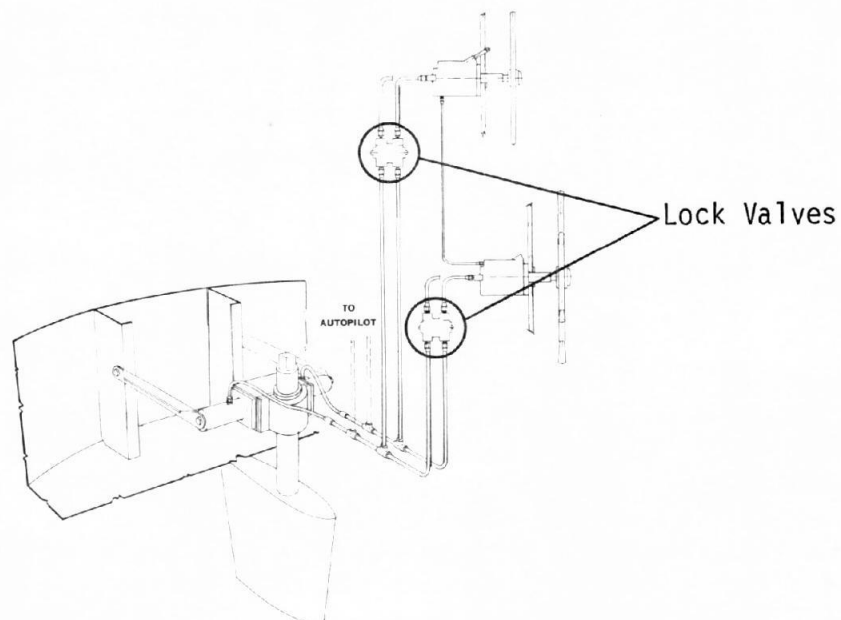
HYDRAULIC SYSTEM WITH TWO LOCK VALVES
